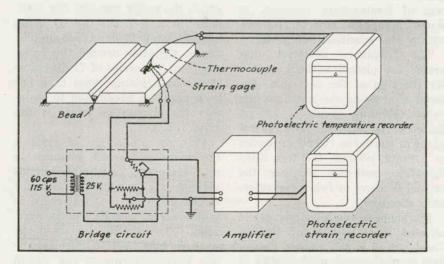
Setup used for measuring stresses occurring during welding operations
